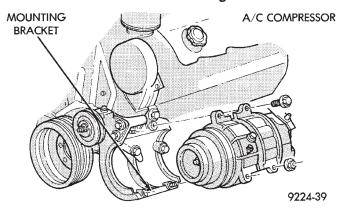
A/C Compressor Removal and Installation—3.0 L Engine
